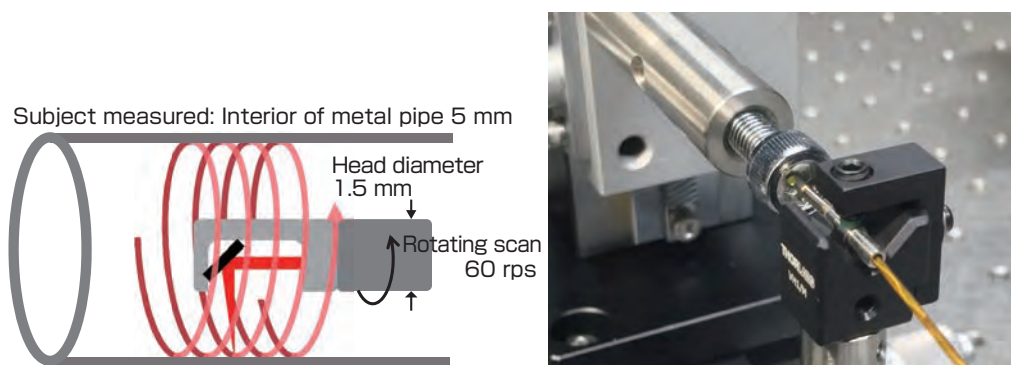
Appearance of a rotating probe of 1.5 mm diameter (left), and measurement of a sample (head part of M6 screw) (right)
